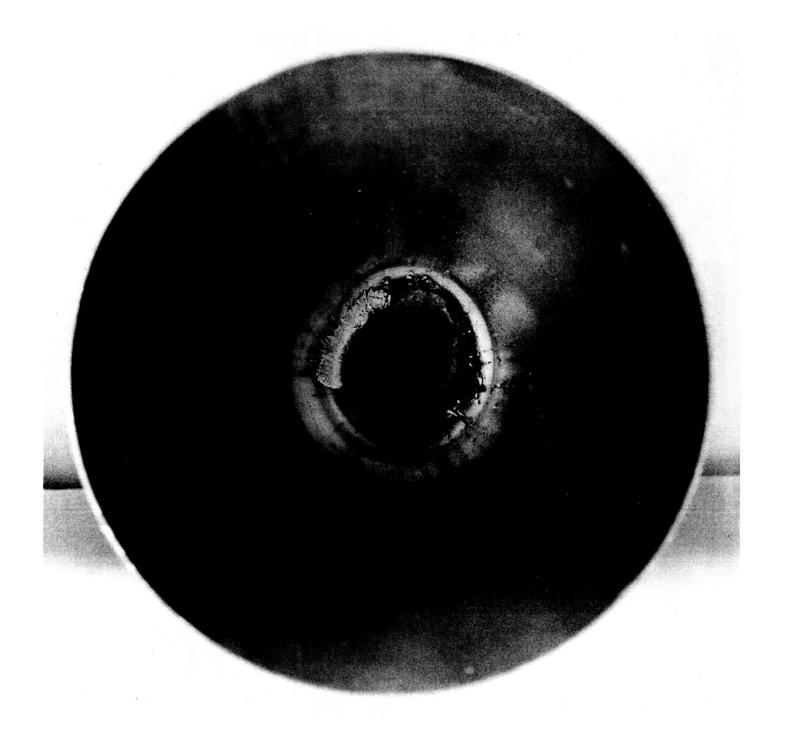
Chamber Assembly From Engine S/N 1 After Test Looking at Throat
